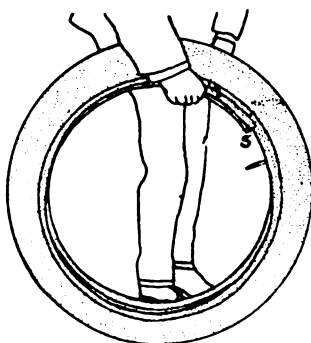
TO REMOVE TIRE FROM TYPE "E" RIMS WITHOUT AID OF OPERATING TOOL
